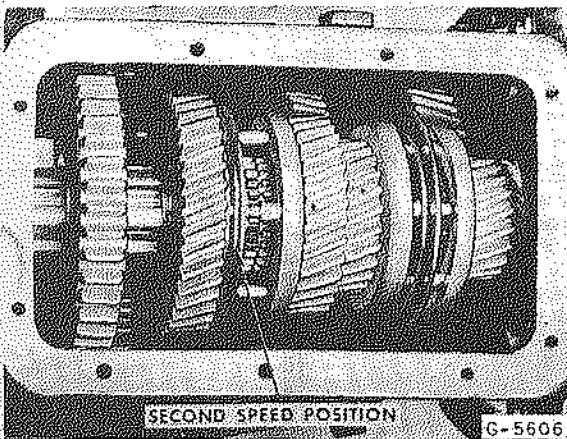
Synchronizer Positions With Transmission in Second Gear
